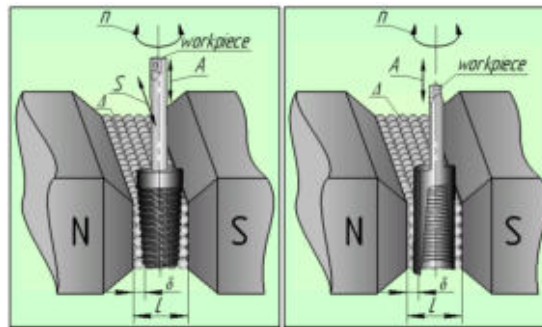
Magnetic-abrasive finishing of external and internal threaded surfaces
